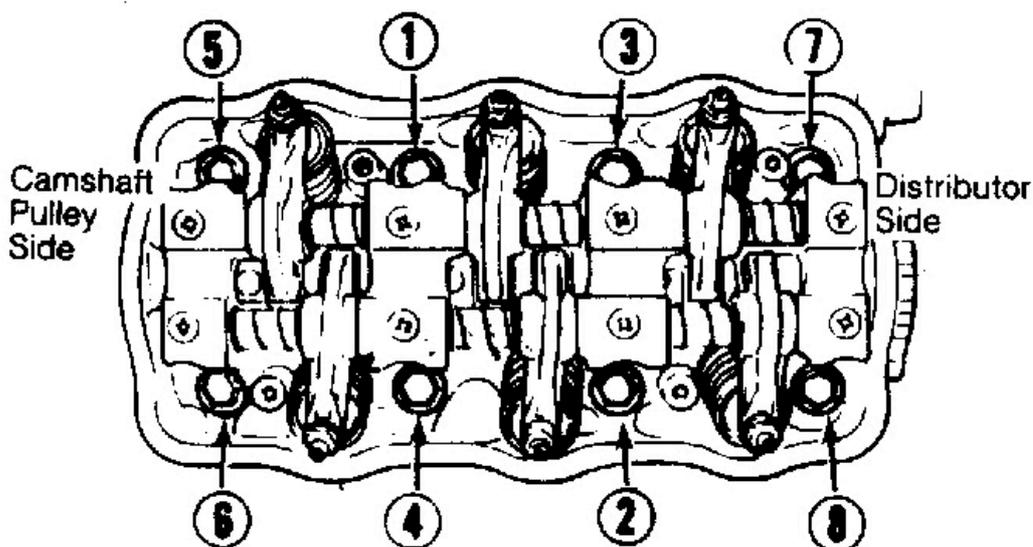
Cylinder Head Tightening Sequence Courtesy of GENERAL MOTORS CORP.
